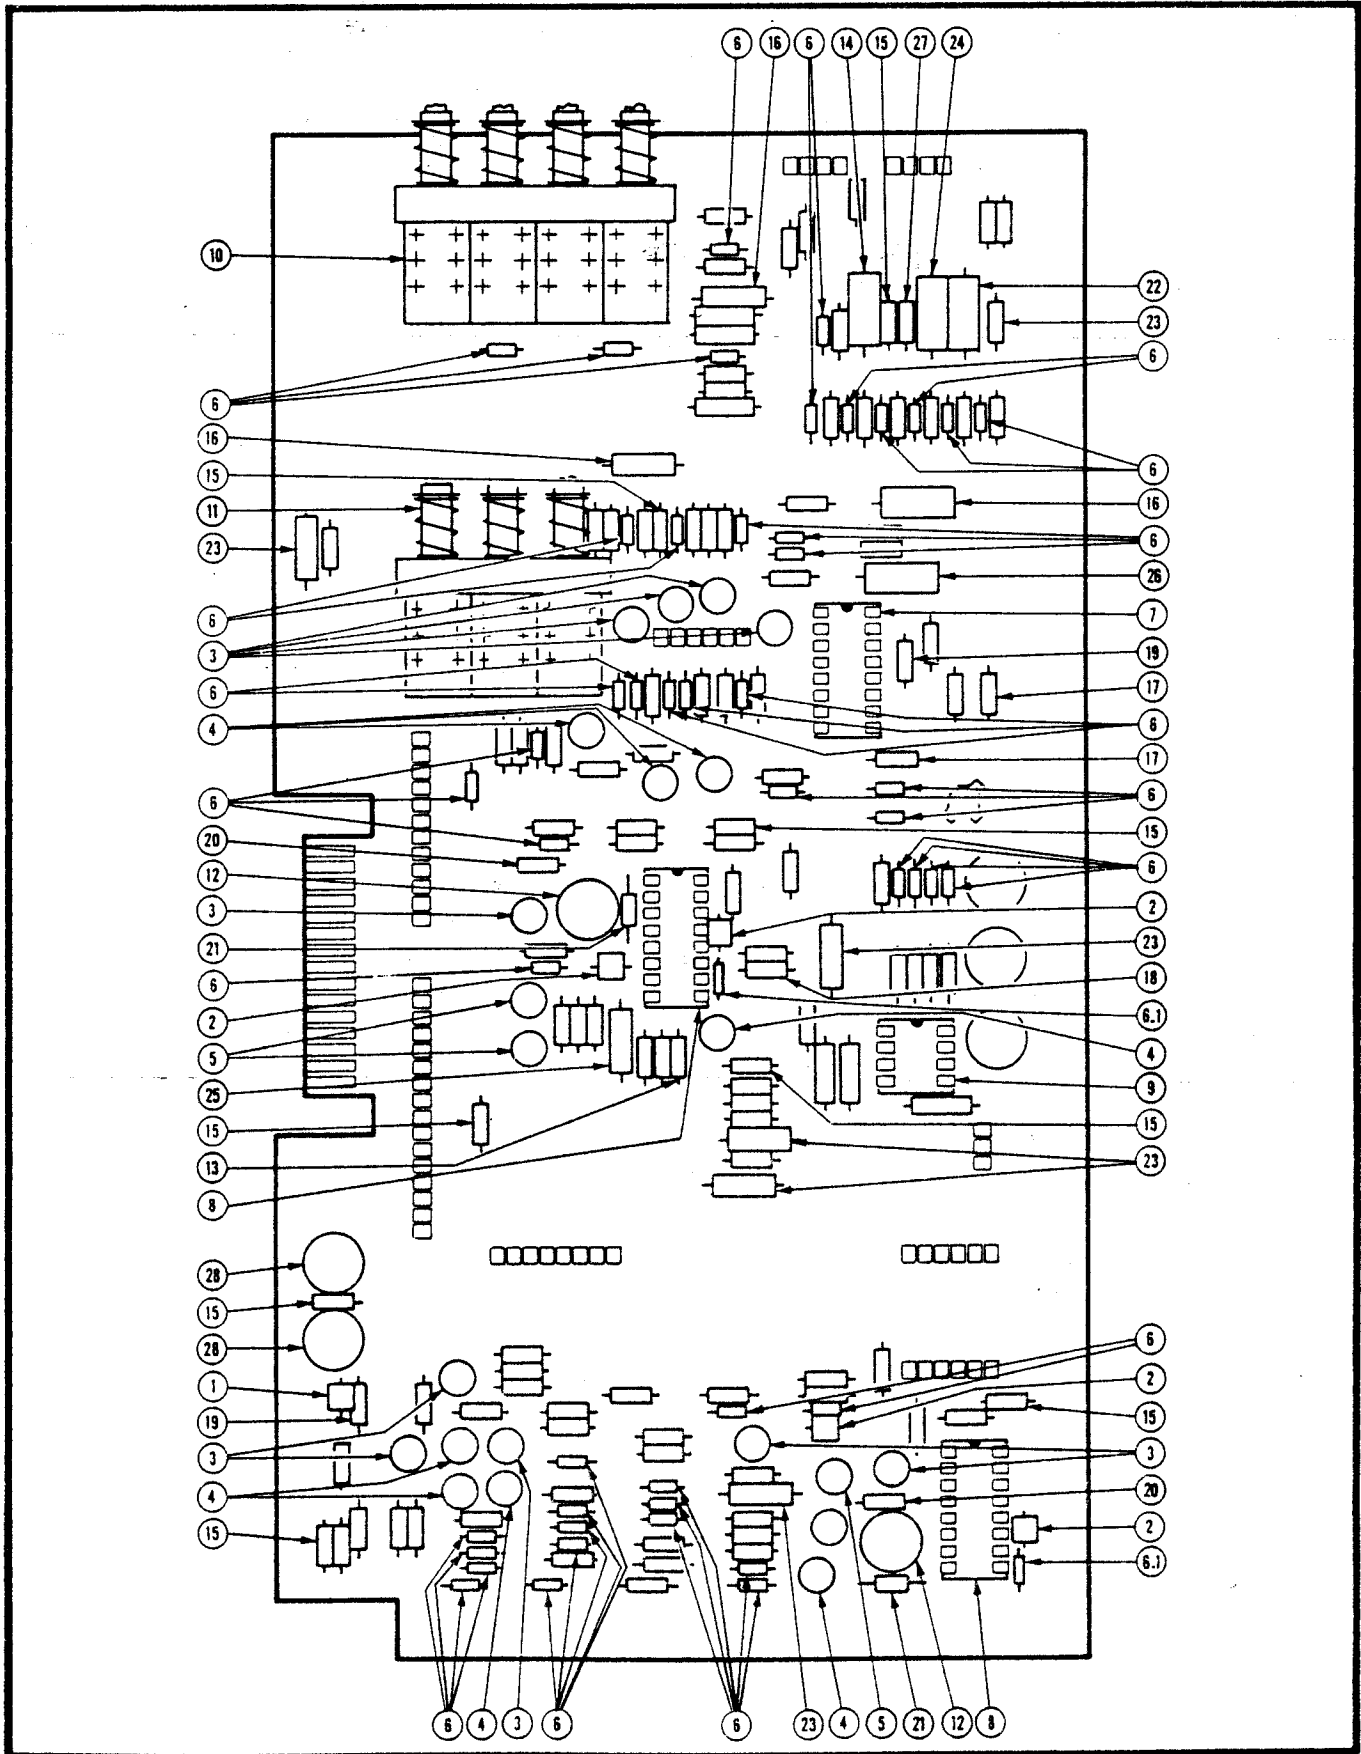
A8 Circuit Board Assembly, Sweep (sheet 1 of 3).
